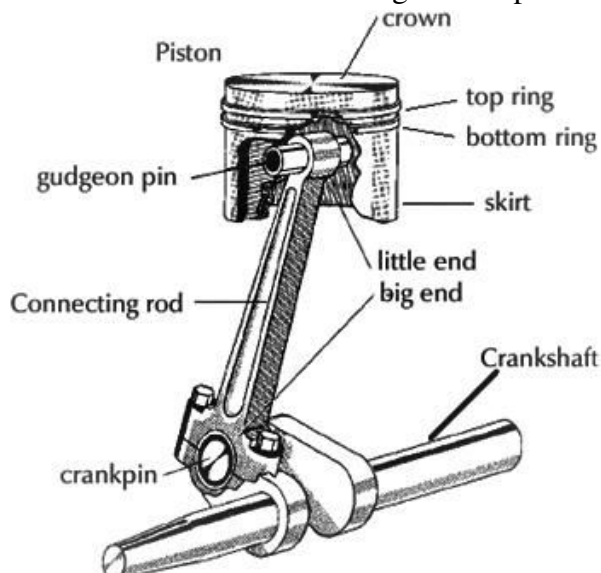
Assembly of the connecting rod, piston, and crankshaft
